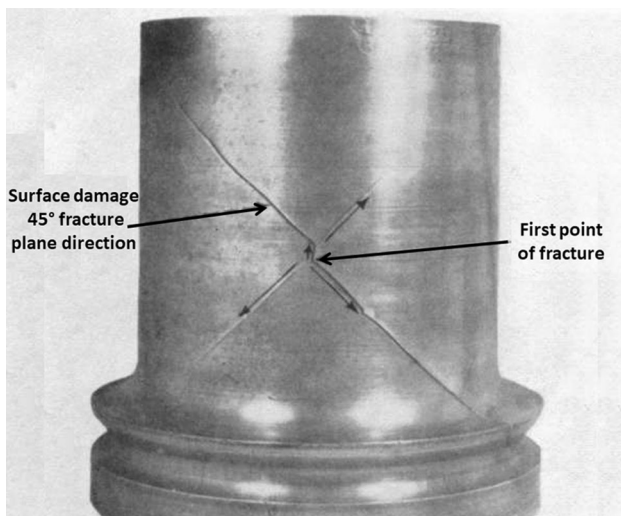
Fracture in X (starburst pattern) due to the presence of inversion of torsional loads. “Fatigue Failures, With Special Reference to Fracture Characteristics,” G. A. Cottell, M.Sc., A.I.M. 2004 ASM International
